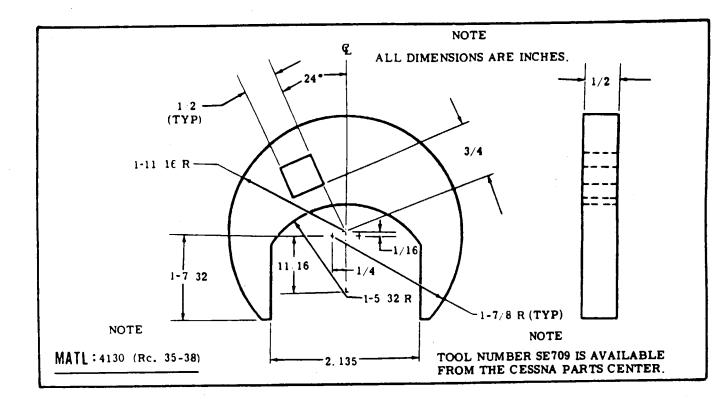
Oil Filter Adapter Wrench Fabrication
